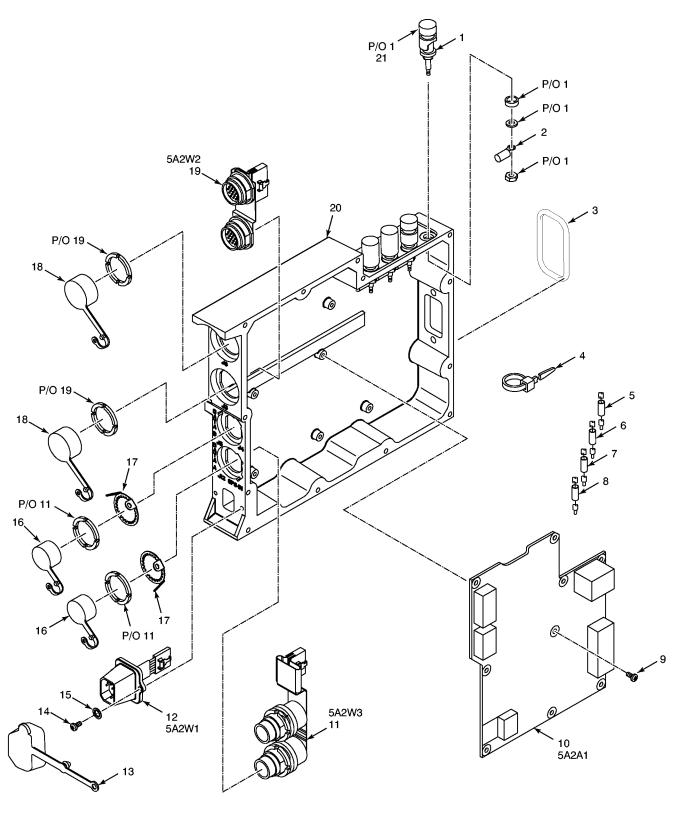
Electrical Chassis-Electronic Equipment-Adapter/Power Supply (Sheet 1 of 2)
